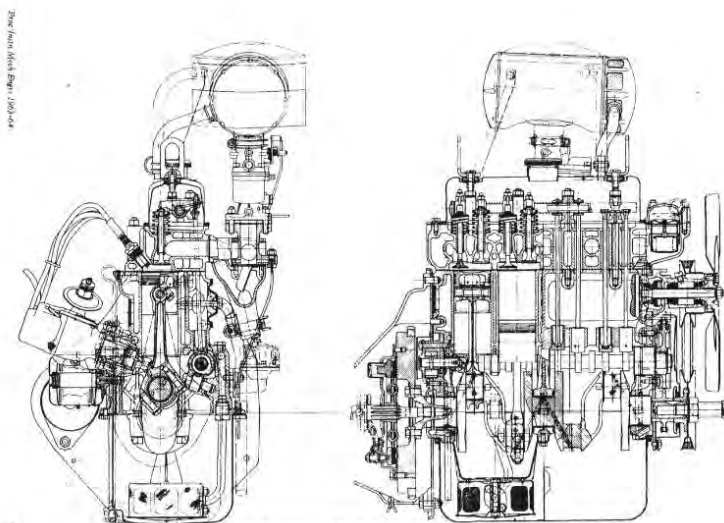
Arrangement of 800 cm³ engine: longitudinal and cross sections
